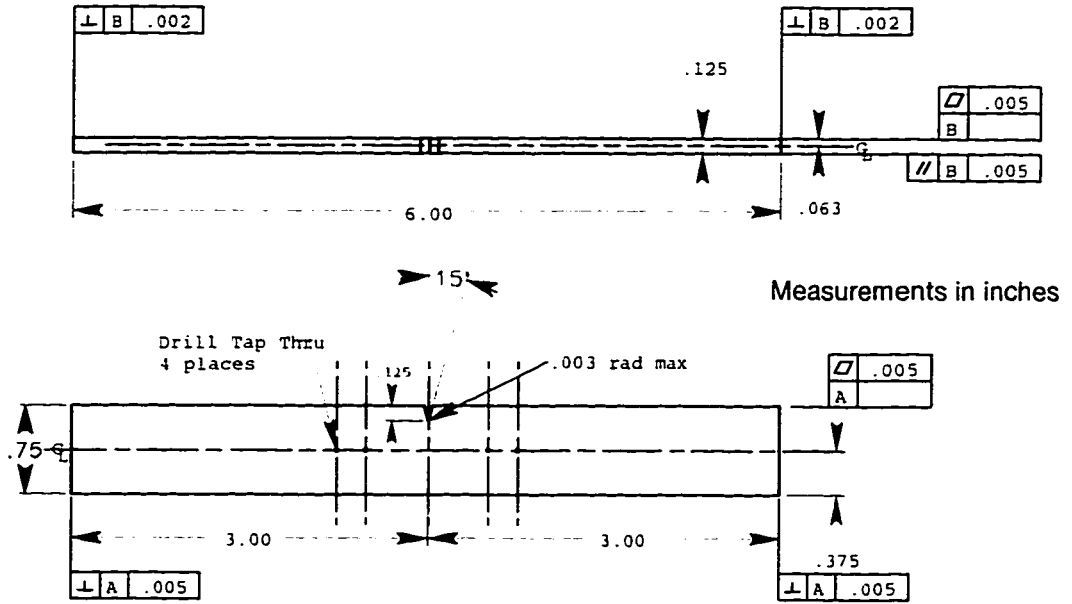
Shallow notched single edged bend specimen. (Figures appear larger in Appendix A for clarity.)
